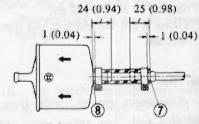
Fuel damper to fuel feed pipe rubber hose
